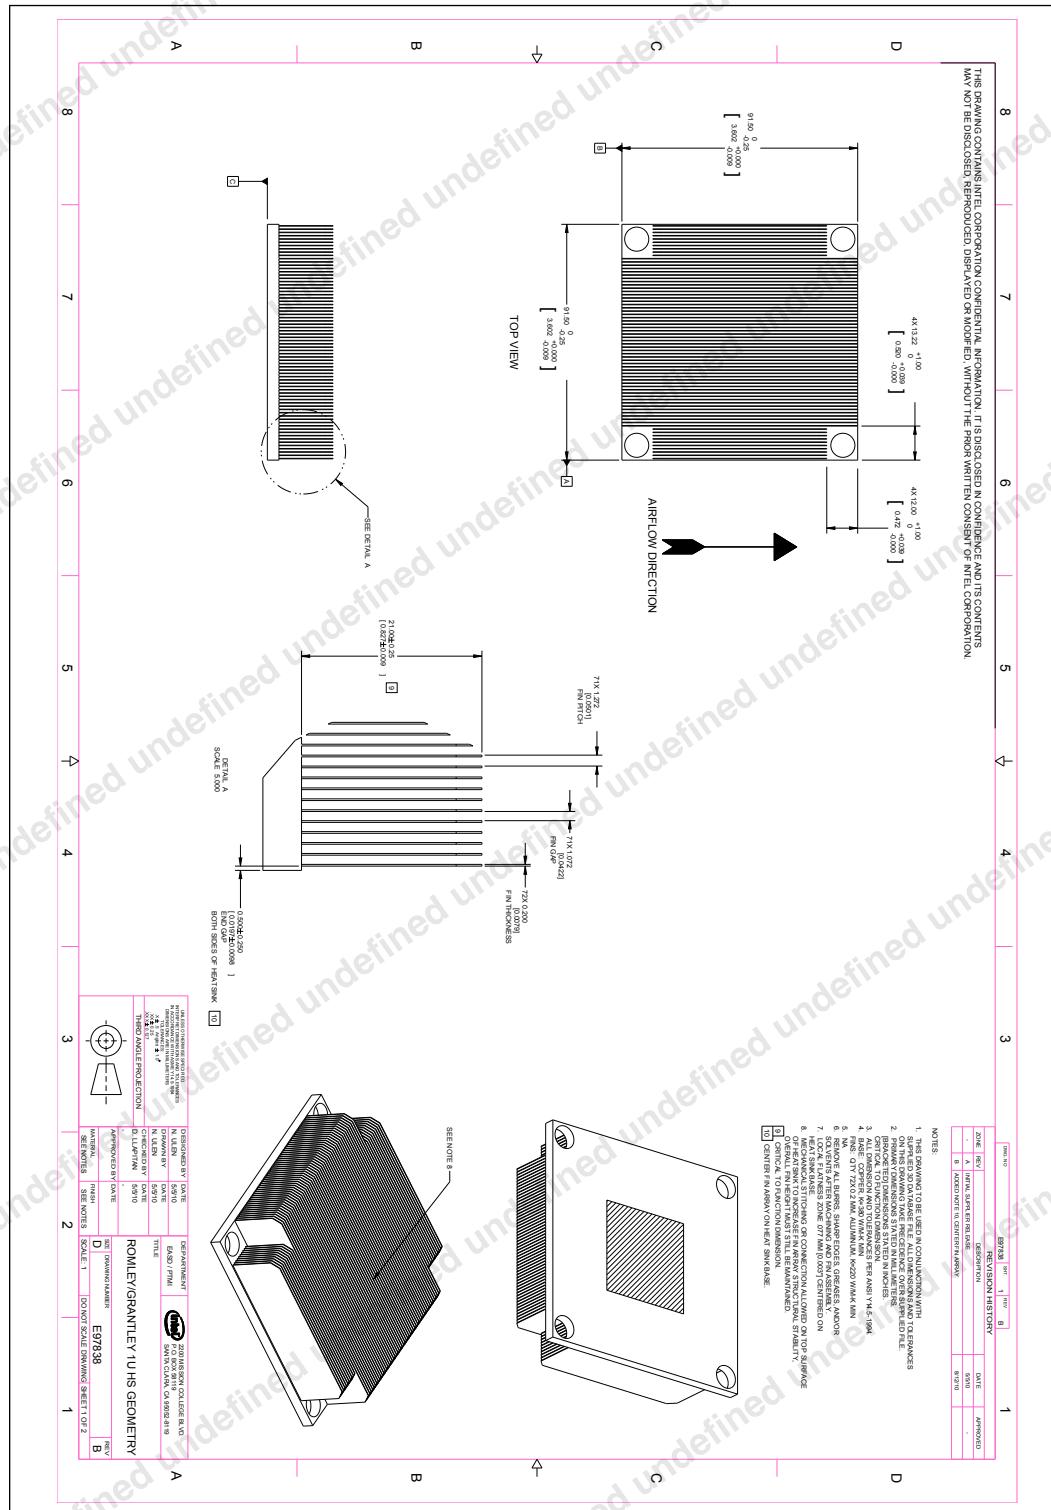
1U Narrow Heat Sink Assembly (Page 2)
